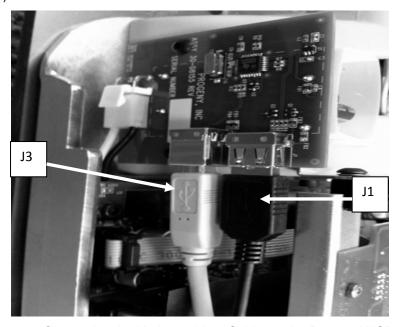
Connecting the Horizontal Arm Cables to the Powered USB Hub
